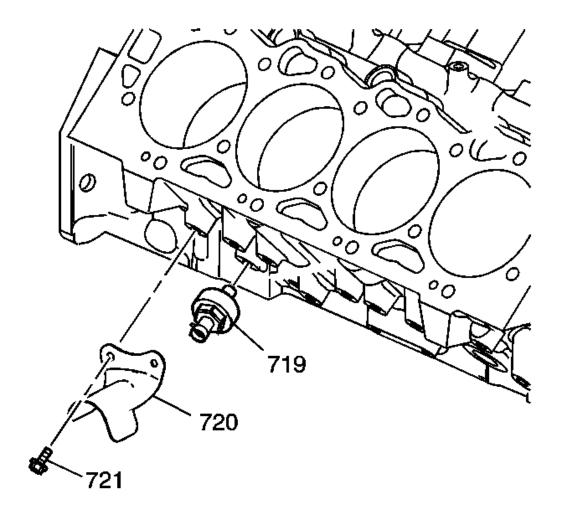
View Right Side Knock Sensor, Heat Shield & Bolts Courtesy of GENERAL MOTORS CORP.
